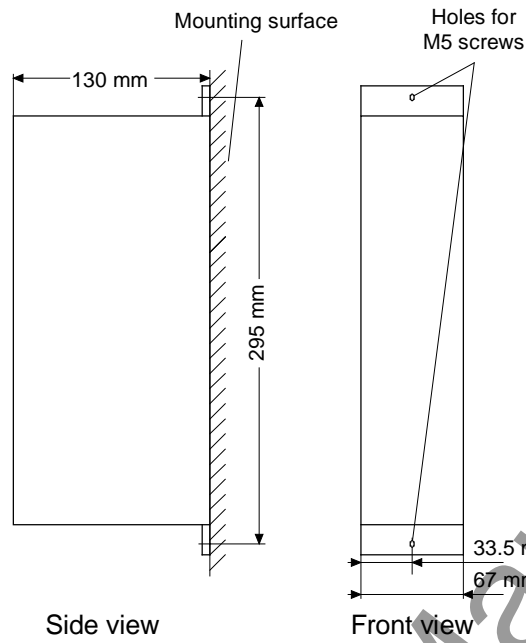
Dimension drawing of the 6 A EMC filter
